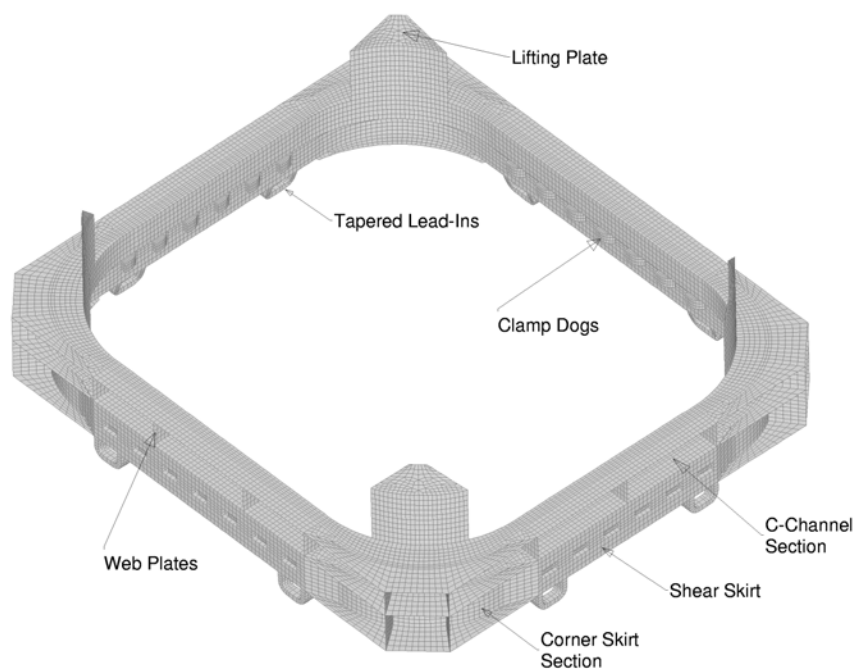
Spent Fuel Container Transfer Clamp Model
